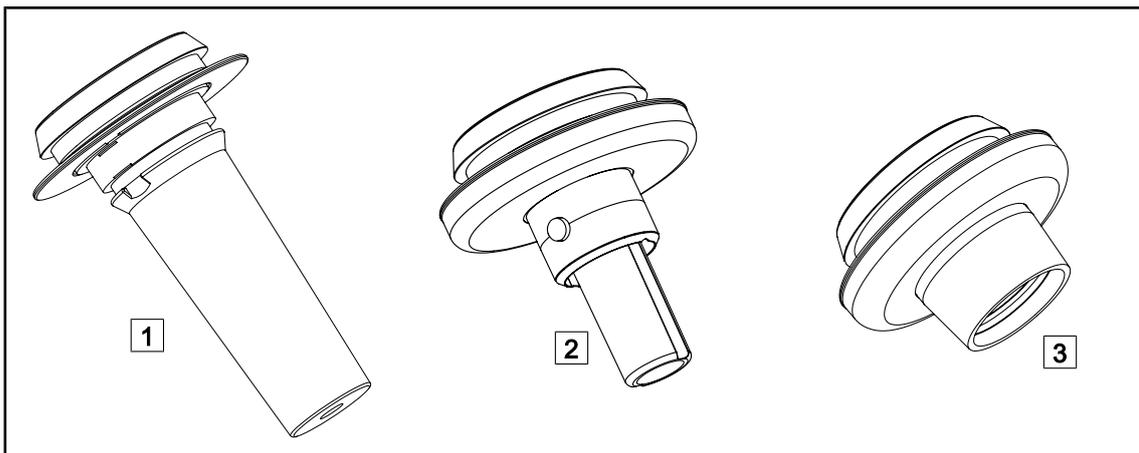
Handle mounts for Maquet PowerLED II lightheads
